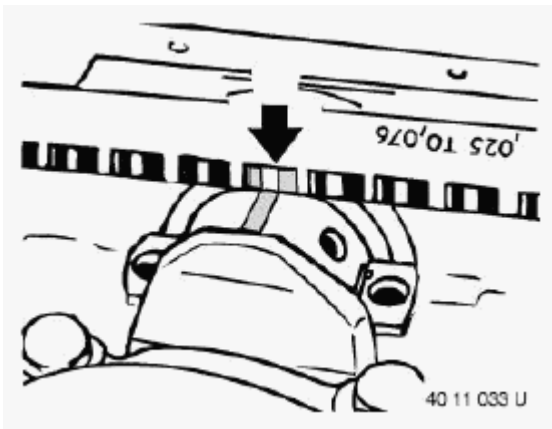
Reading Conrod Bearing Play At Width Of Flattened Plastic Thread On Measurement Scale
